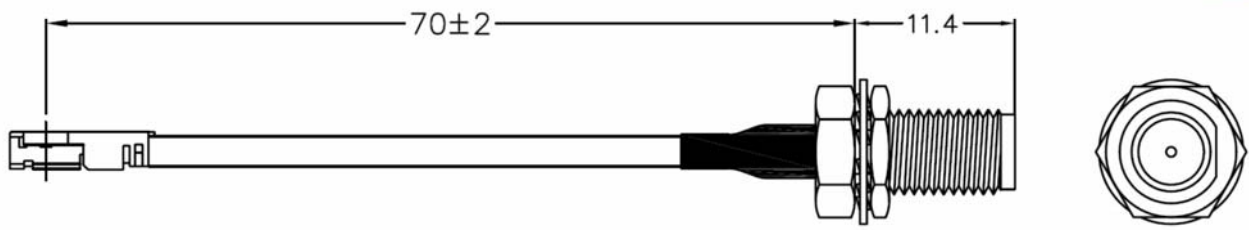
ORG9805 MECHANICAL OUTLINE
